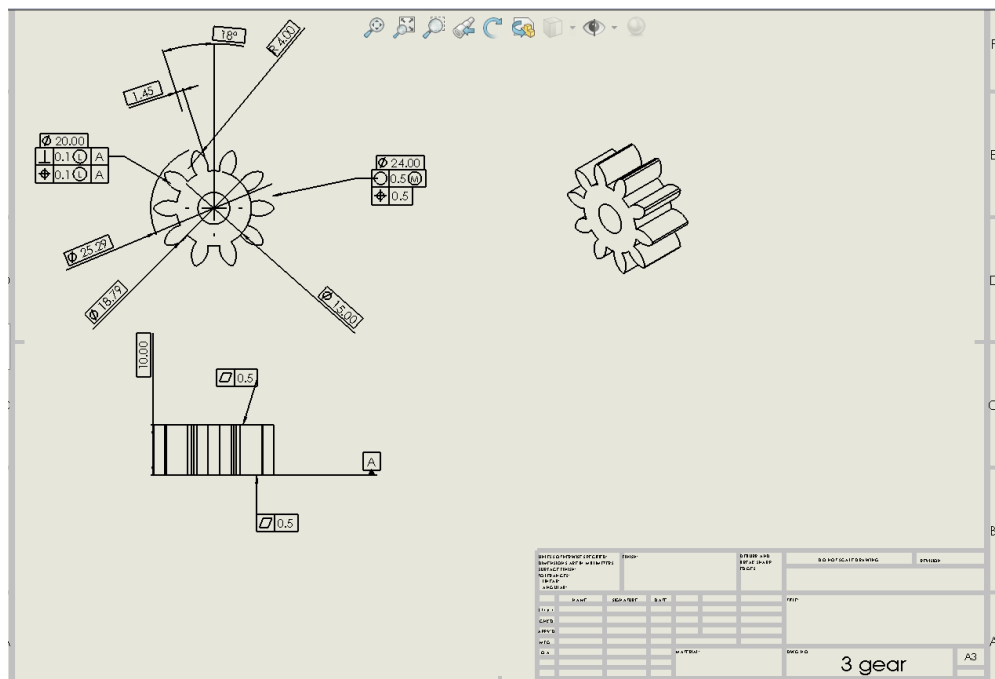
Engineering Drawing of SCARA Gear (millimeter precision)
